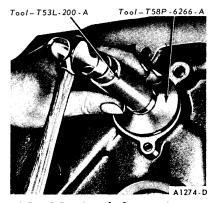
Camshaft Rear Bearing Bore Plug Installation
